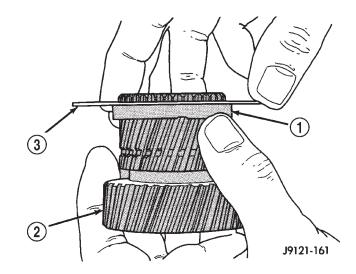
Installing Driving Shell Front Thrust Plate On Sun Gear
